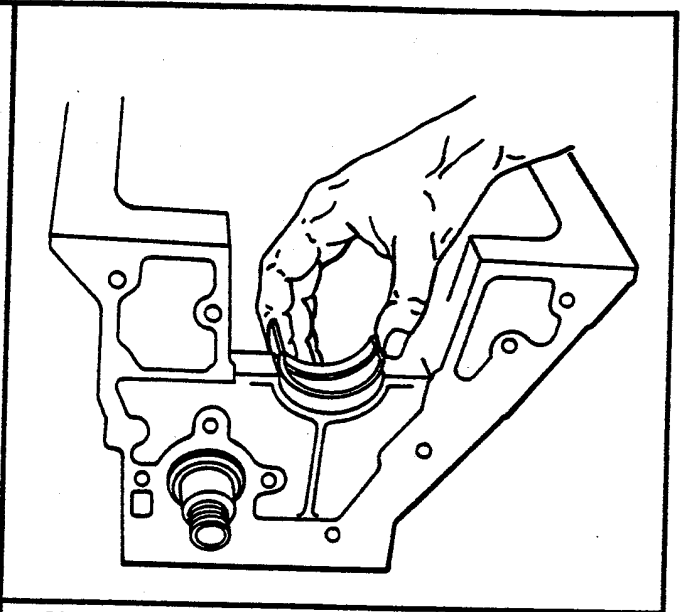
PLACING MAIN BEARING UPPER HALF
